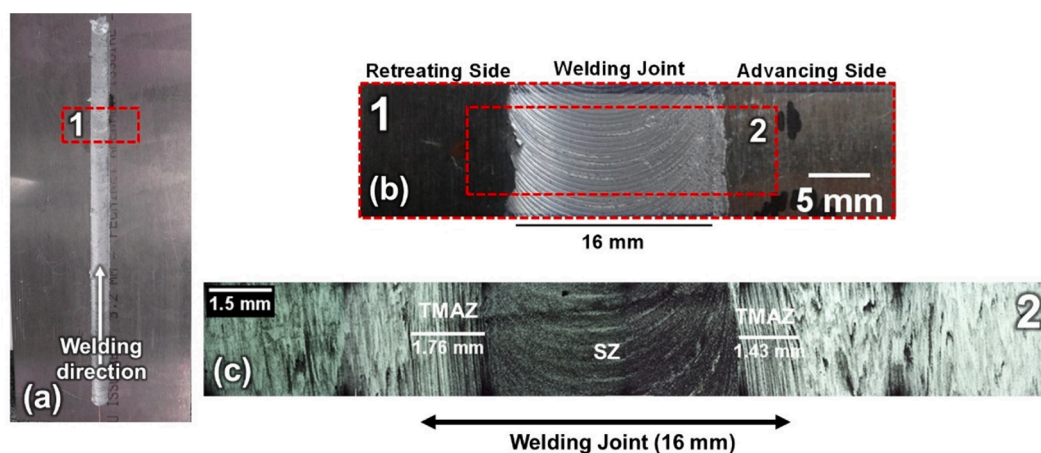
Optical macrographs and microscopy of a 2098-T351 aluminum plate welded by friction stir welding (FSW), highlighting the welding joint dimensions and the locations of the retreating side (RS) and advancing side (AS): (a) macrograph of the entire plate showing the welding direction and joint; (b) detailed macrograph of the red dashed square in (a), illustrating the welding joint dimensions (16 mm) and sides (RS and AS); and (c) optical microscopy of the weld, showing the distinct welding zones, including the stir zone (SZ) and thermomechanically affected zone (TMAZ), with their respective thicknesses.
